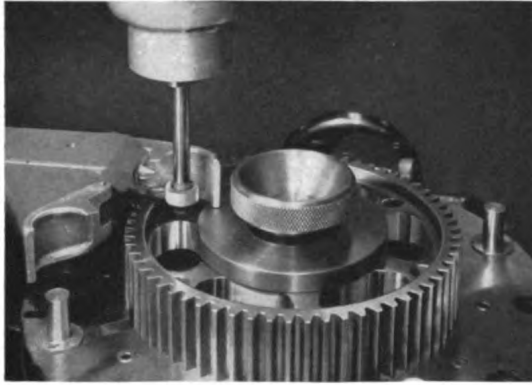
Jig Grinding aircraft engine gears with indexing fixture and automatic wheel sizing.
